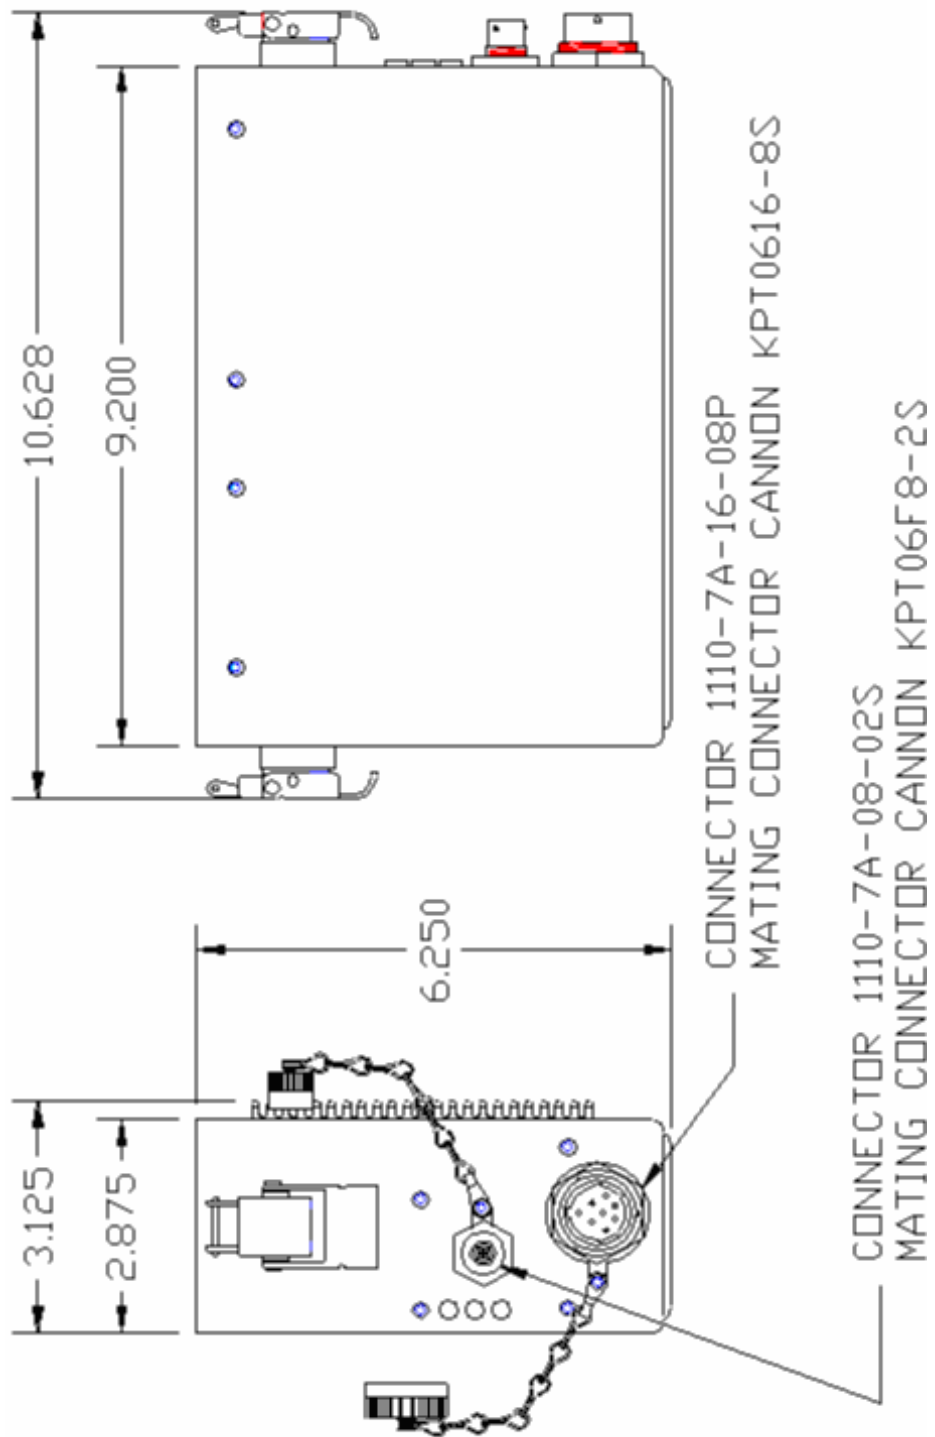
MRC-93 LAYOUT AND DIMENSIONS
